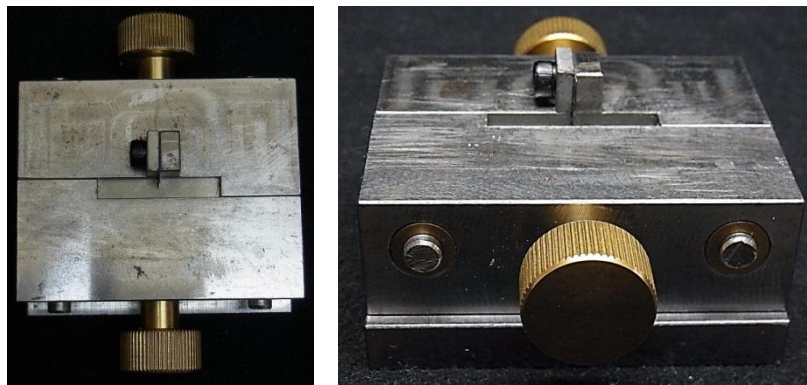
Stainless Steel Split Mold for Single Edge Notch Technique
